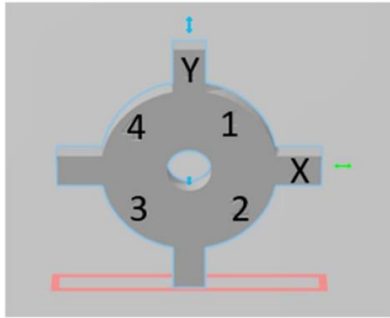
Final design of the calibration coupon showing engraved letters “X” and “Y” and numbers “1” through “4” (Meshmixer software, Autodesk, San Rafael, CA), used to ensure proper orientation and accurate measurement of the coupons.
